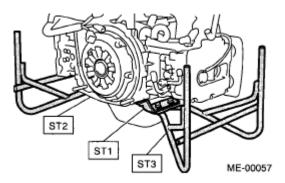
Identifying Engine Stand Adapters And Engine Stand Courtesy of SUBARU OF AMERICA, INC.
